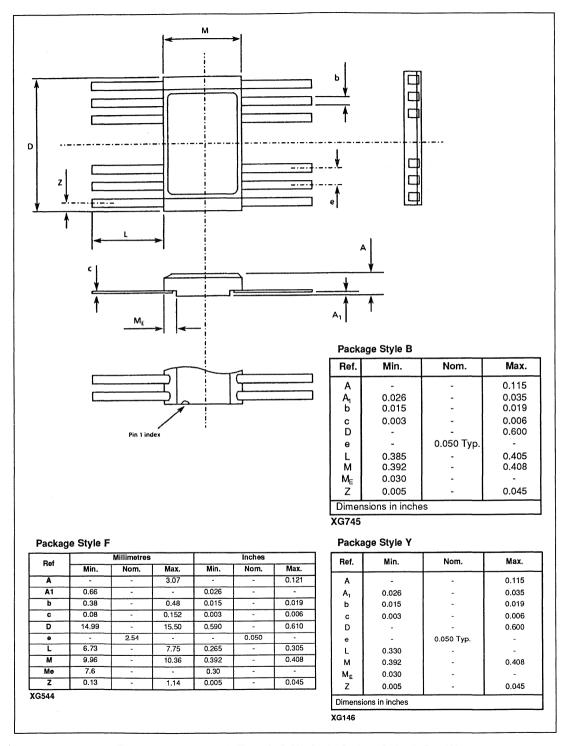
24 Lead Ceramic Flatpack (Solder Seal) - Package Styles B, F and Y
